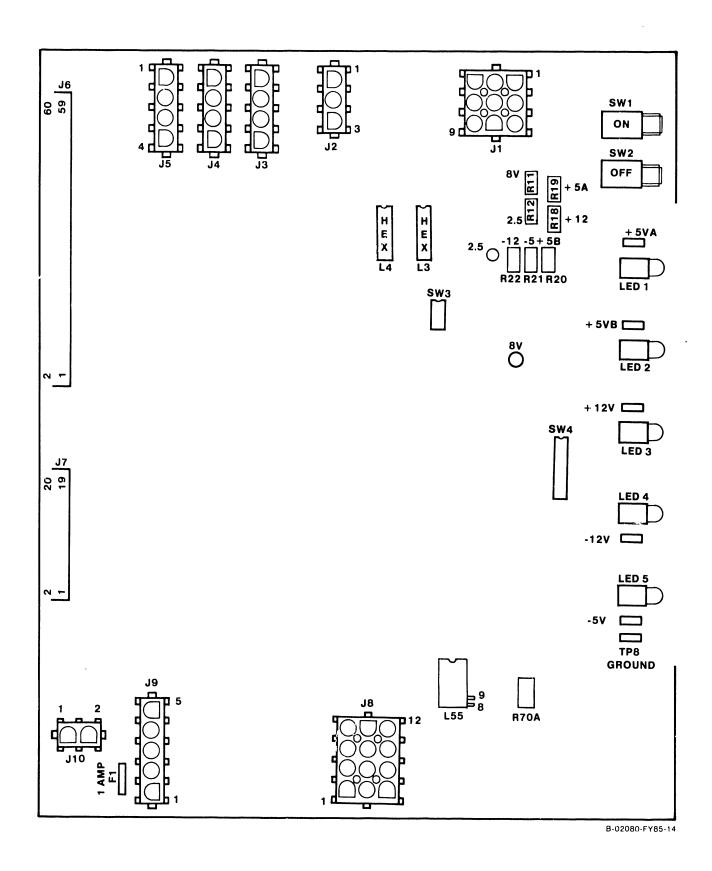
Power Supply Controller Board. (Rev. 0 Version)
